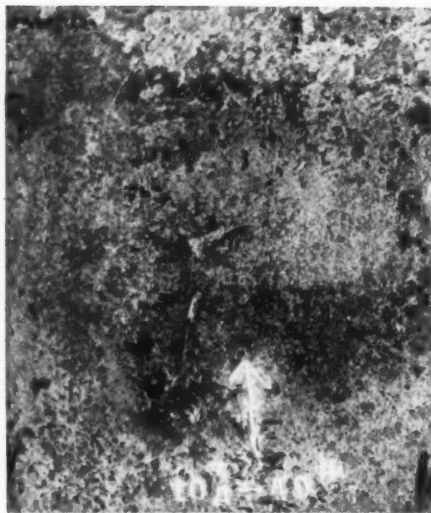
Section of hot rolled pipe. Surface shows slight indications of containing a defect.
